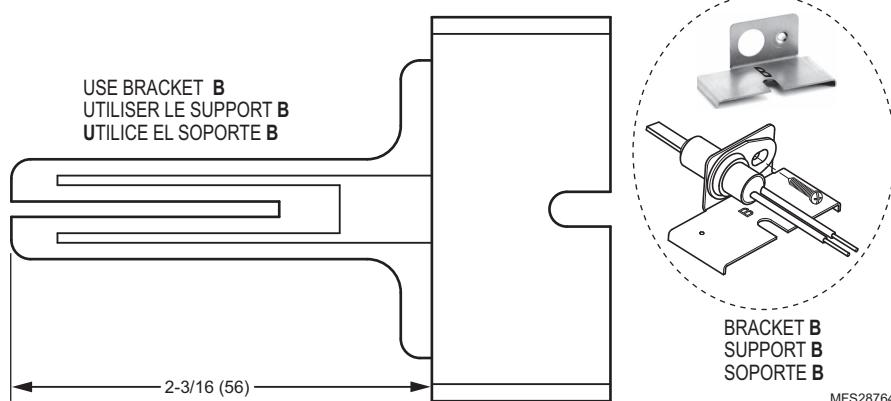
Igniter bracket B template; dimensions in in. (mm).
